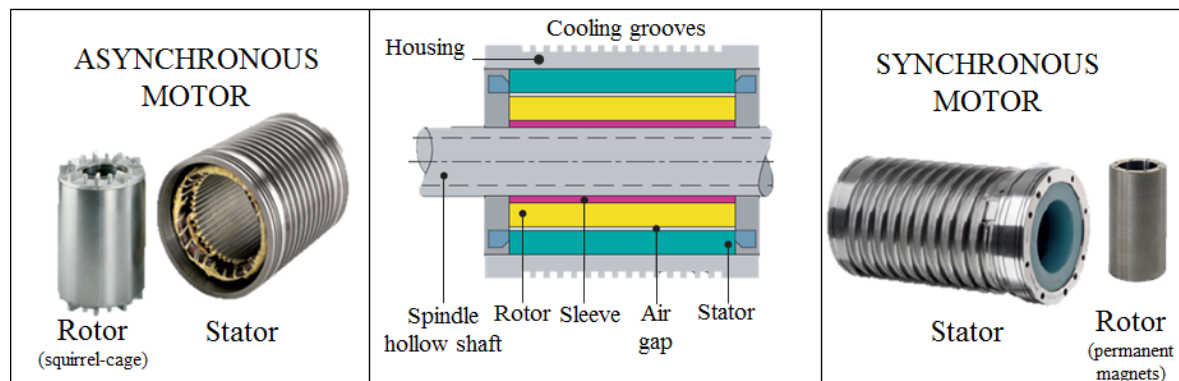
Examples of AC motors components for integral spindle. Modified [Courtesy: Siemens]
